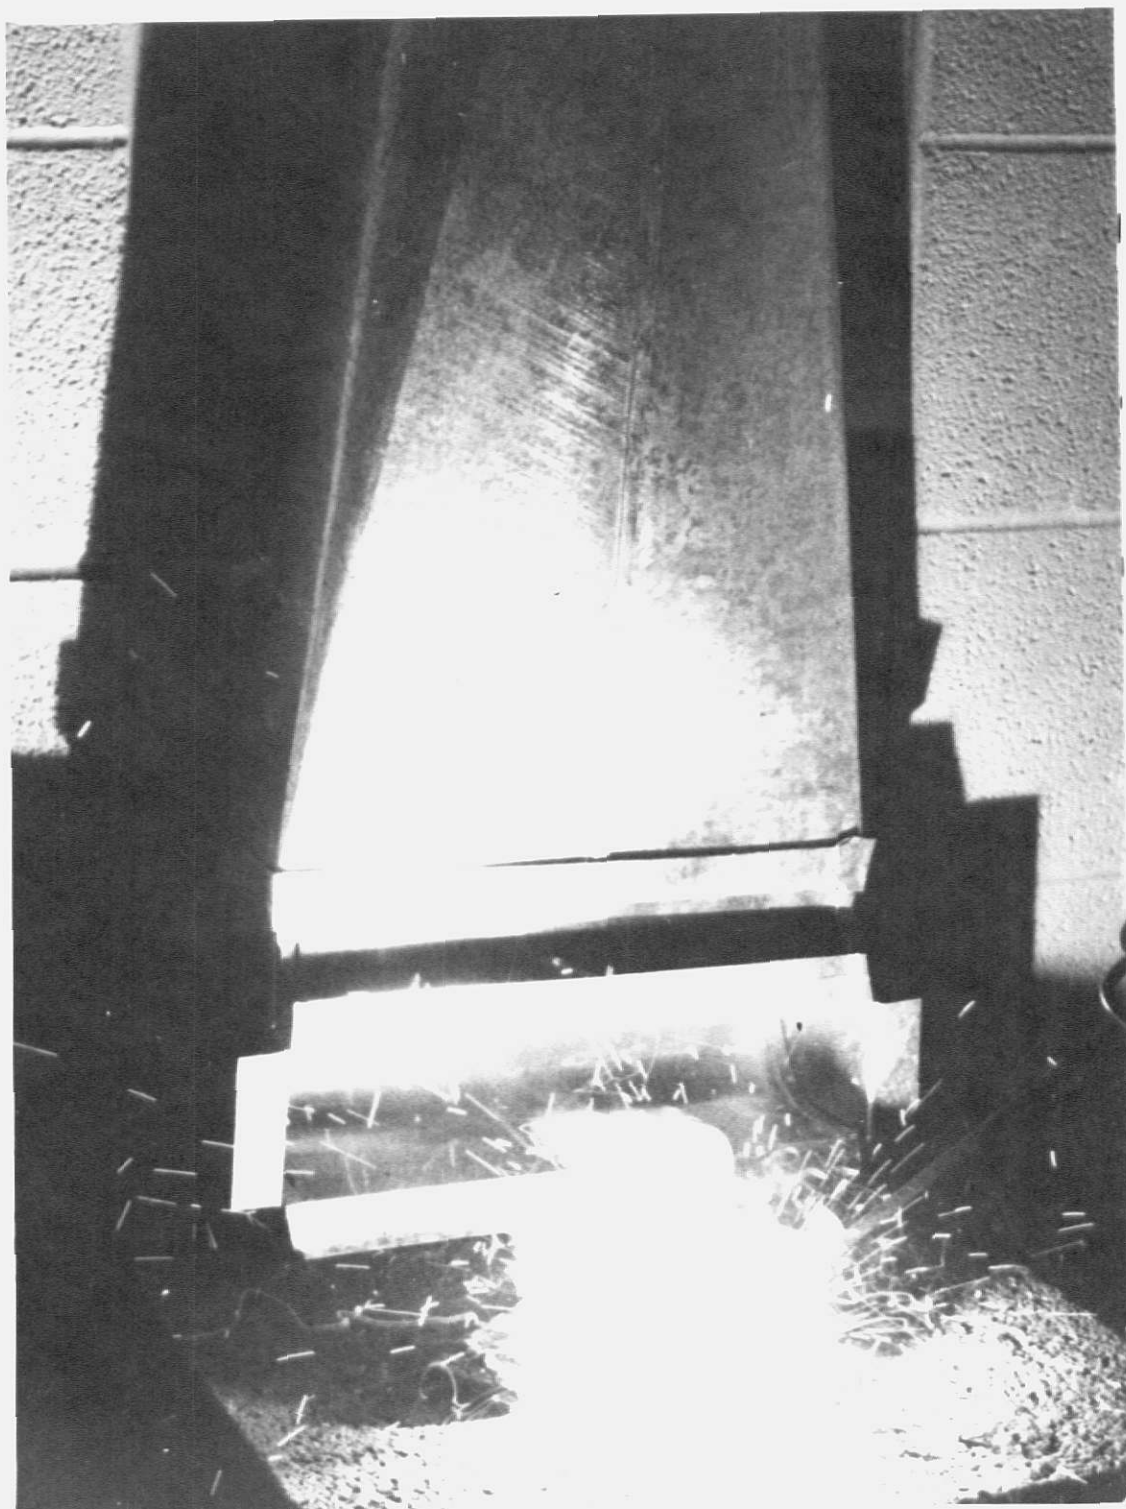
Side-Draft Capturing Hood when Arc-Welding is in Process.
